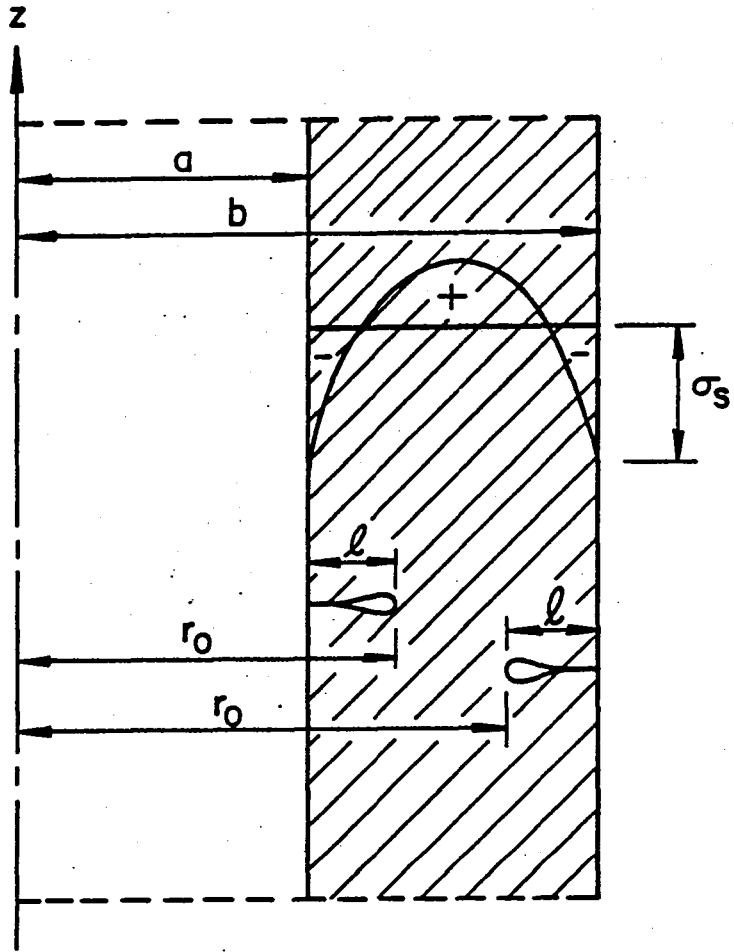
Geometry of edge cracks in a cylinder wall subjected to residual stresses.
